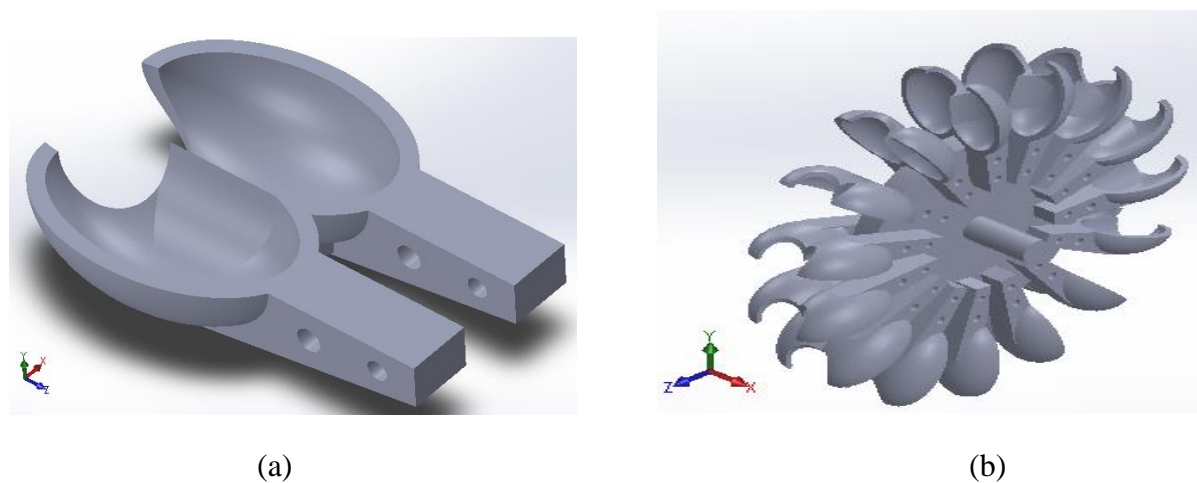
3D model of Pelton turbine, (a) bucket and (b) 3D view of the runner
